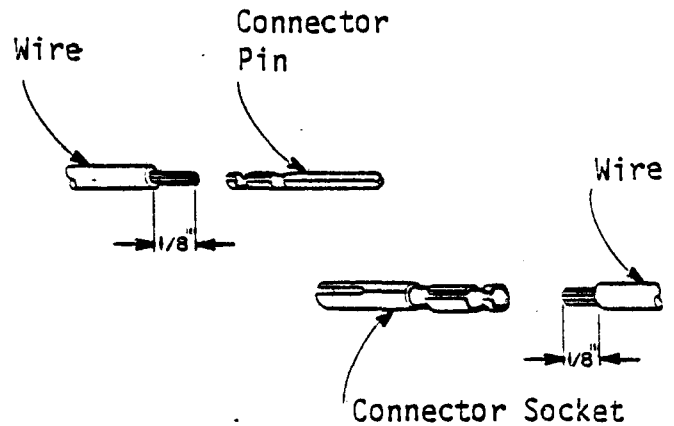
A. Connector Pin and Connector Socket Wire Insertion
